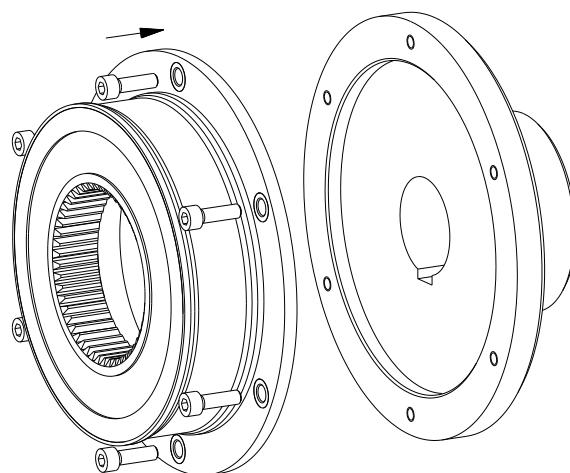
Assembly of the elastomer part to the flange hub resp. coupling flange (example: type HEW1)
